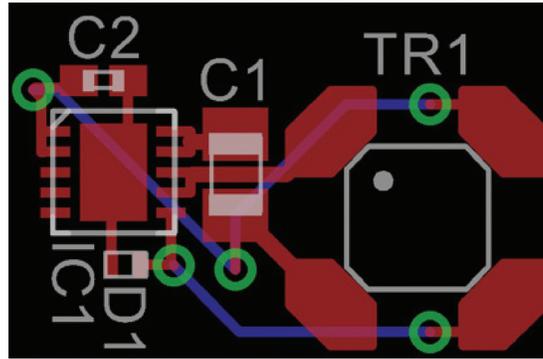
Example Placement for Two-Layer PCB using LPR6235 (DFN Package)
